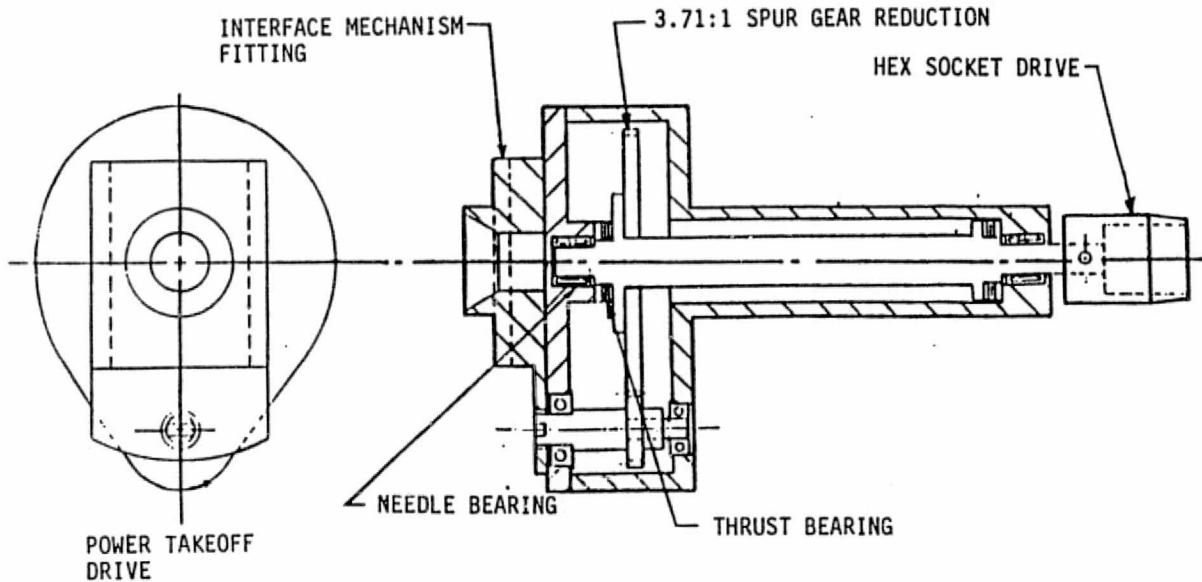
IOSS Adapter Tool - Socket Wrench
